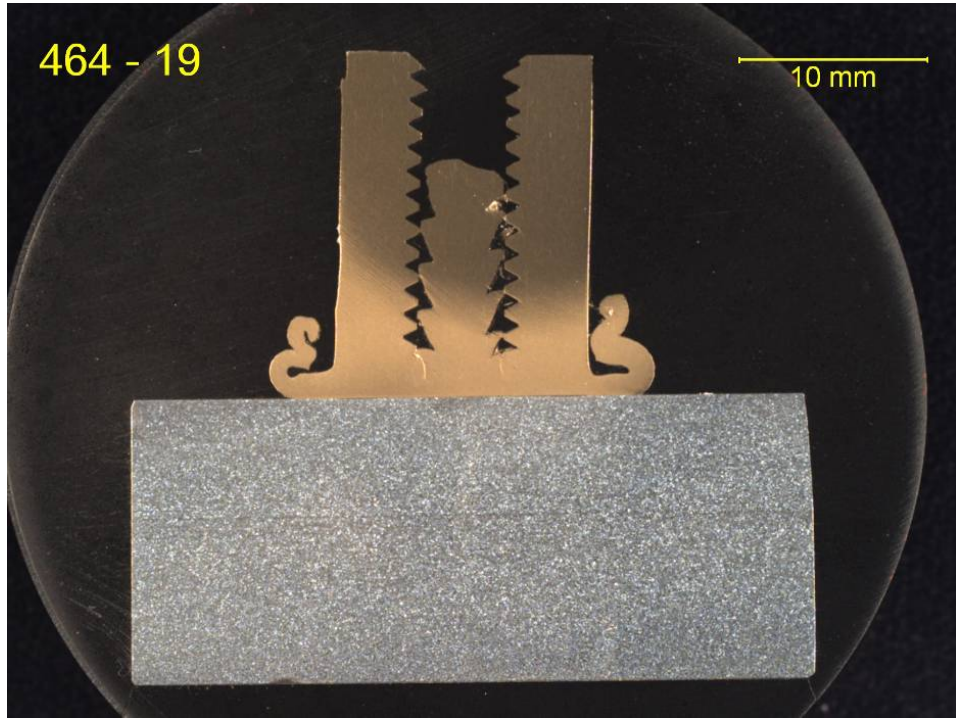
Macro View of Weld 19 in C464 Showing Martensite-Free Joint
